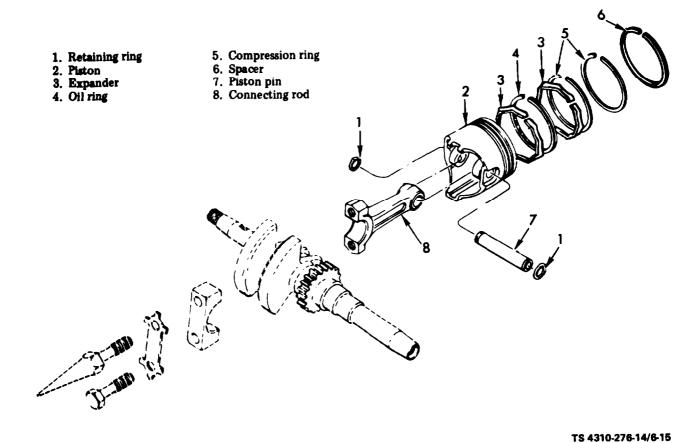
Piston and Connecting Rod Assembly, Disassembly and Reassembly
